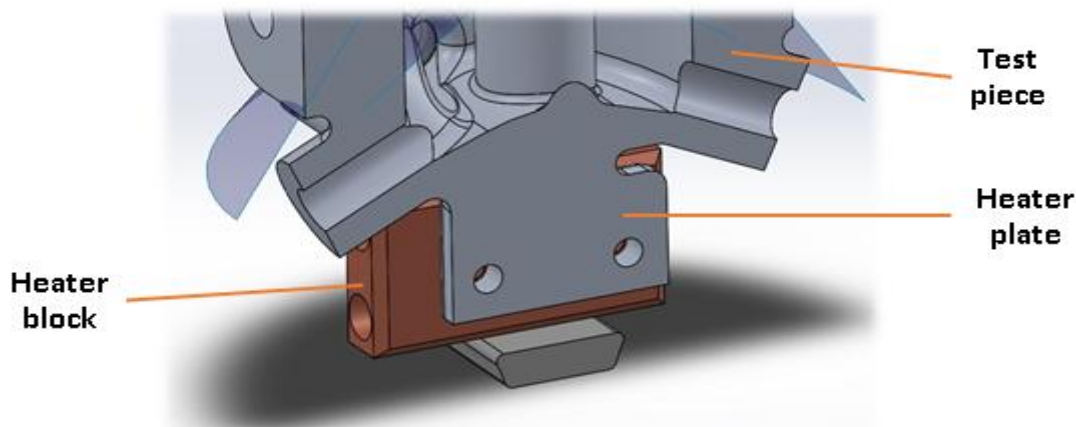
Cross sectional view of the heater plate and the heater block arrangement.
